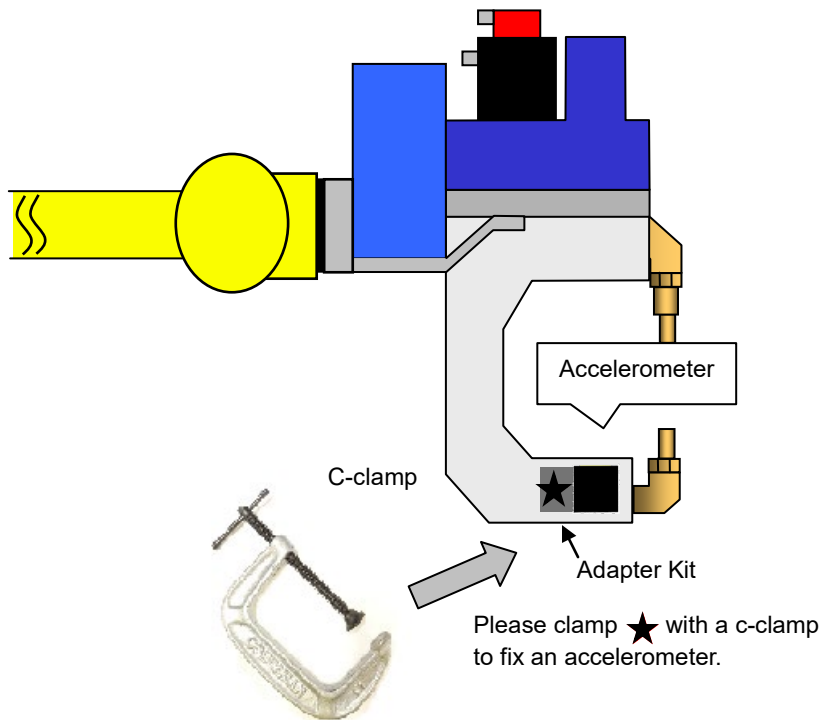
(h) Clamping an accelerometer with a C-clamp kit
